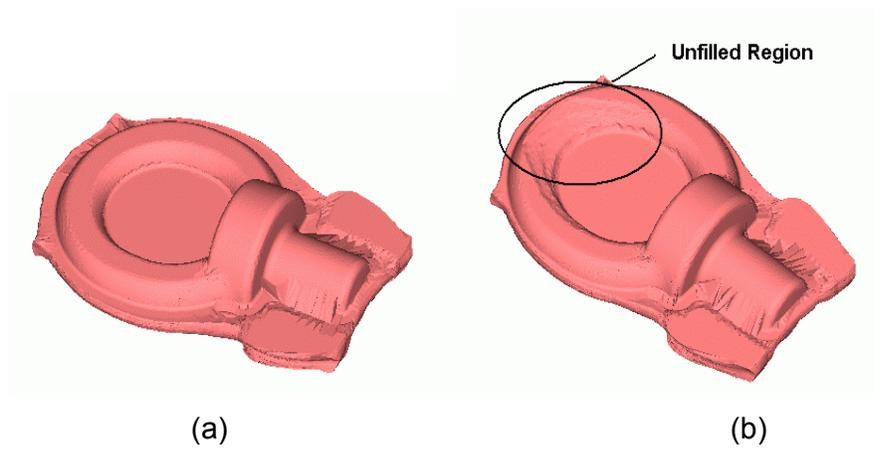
Final Product in Forging M30 Showing (a) Filled and (b) Unfilled Regions
